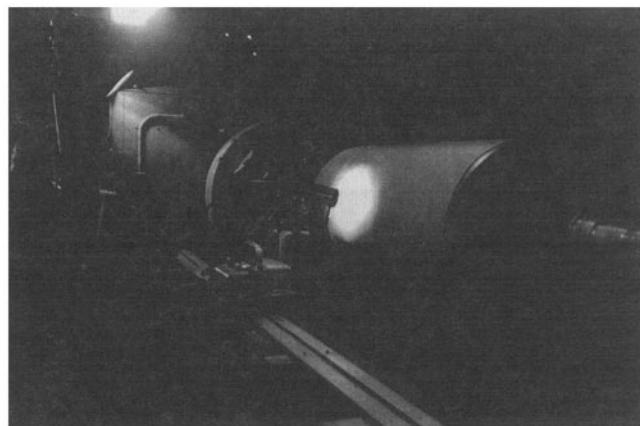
Copper thermal spray coating of mechanically engraved rolls. Copper arc spray coating is being applied onto a large roll 24 in. diam by 46 in. long. More than 100 lb of copper material is applied to this roll to bring it back into dimension and concentricity.
